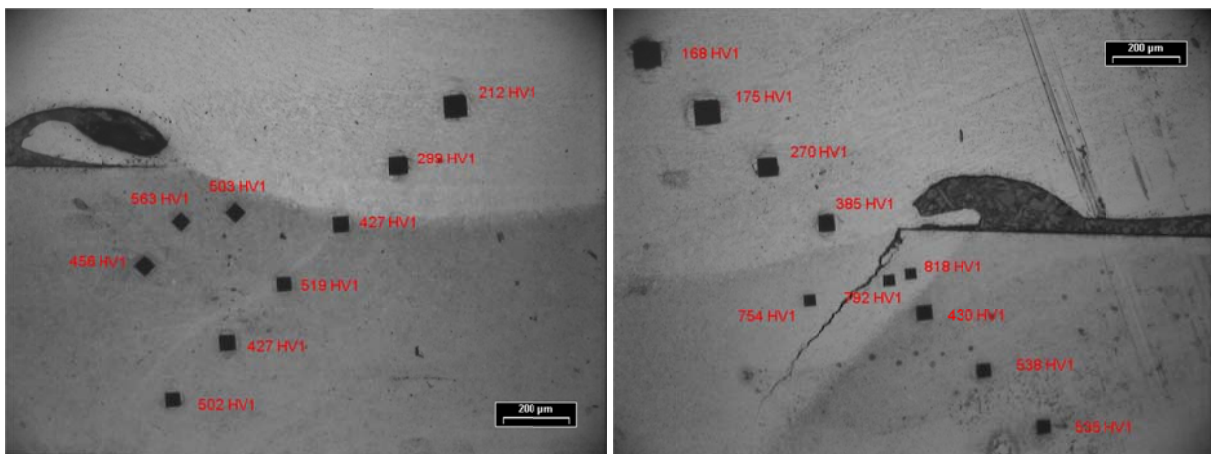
Hardness measurements, weld with good (left) and useless (right) machine parameter settings
